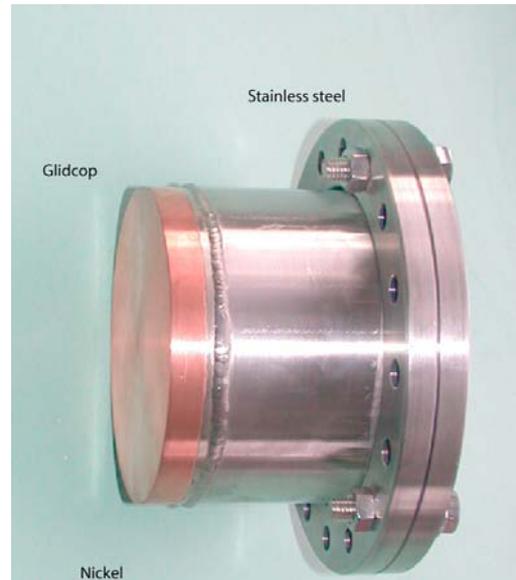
Stainless steel / Glidcop welding with filler wire (ER CU AL A1)
